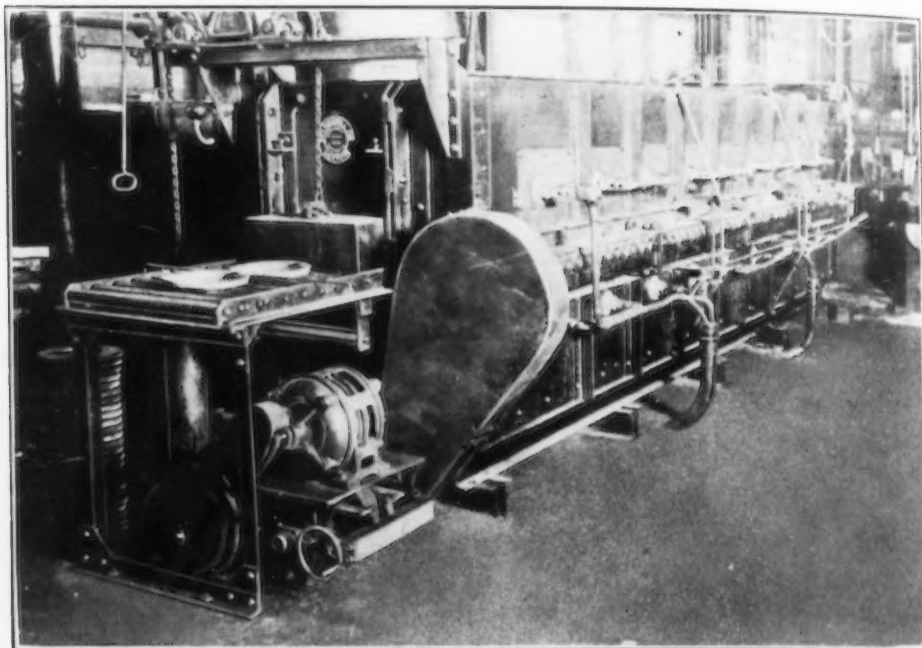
Roller Hearth Furnace for Hardening Ring Gears.
